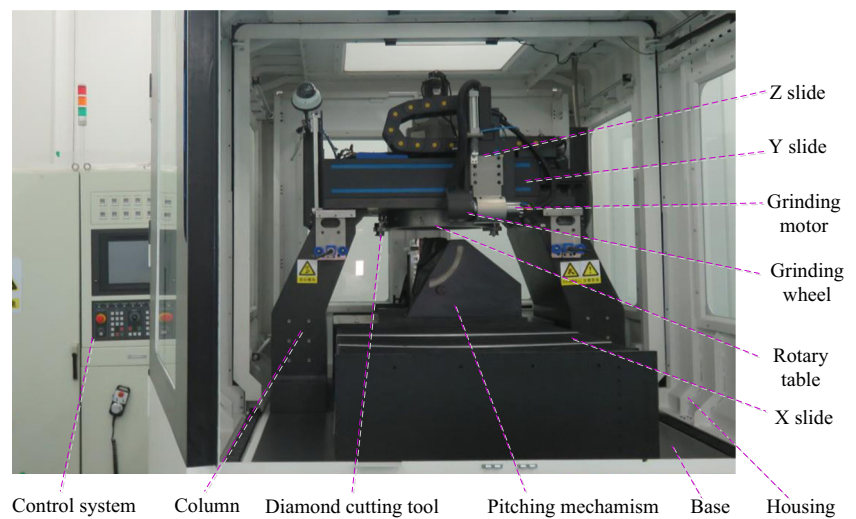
Photo of the combined machine tool for chamfering of KDP crystal
